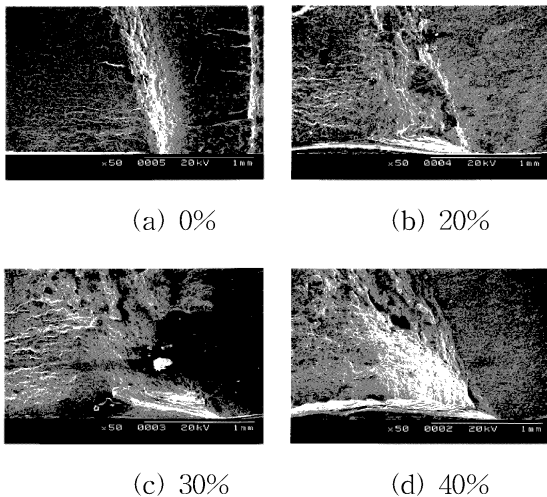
SEM fractograph showing fracture surface of side groove depth
